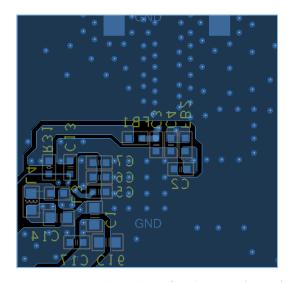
Bottom layer design for 4-layer PCB (QFN56)
